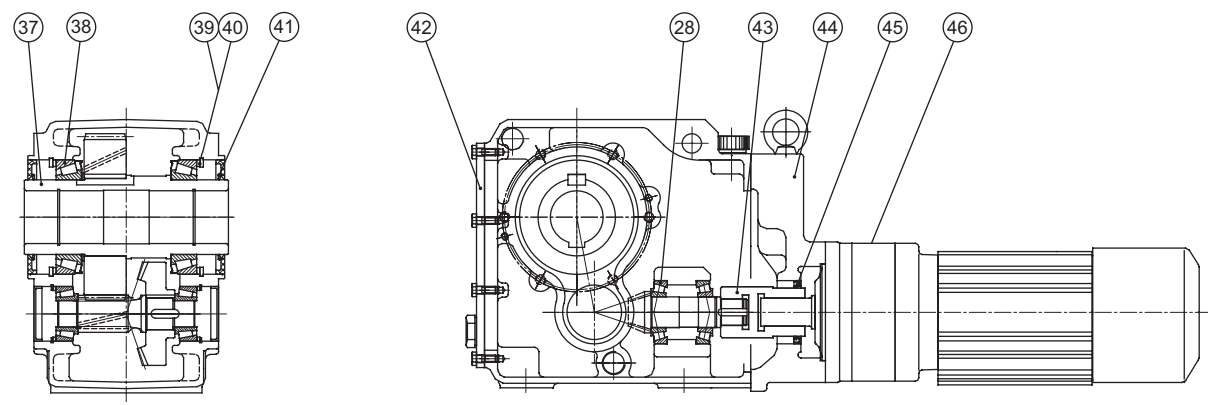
Hollow Shaft Type Gearmotor (Example: KHYM-72DA-Y1)
